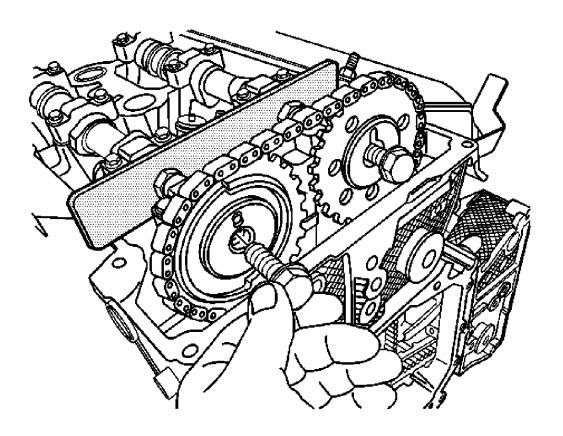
Identifying Right Exhaust Camshaft Sprocket Bolt Courtesy of GENERAL MOTORS CORP.
